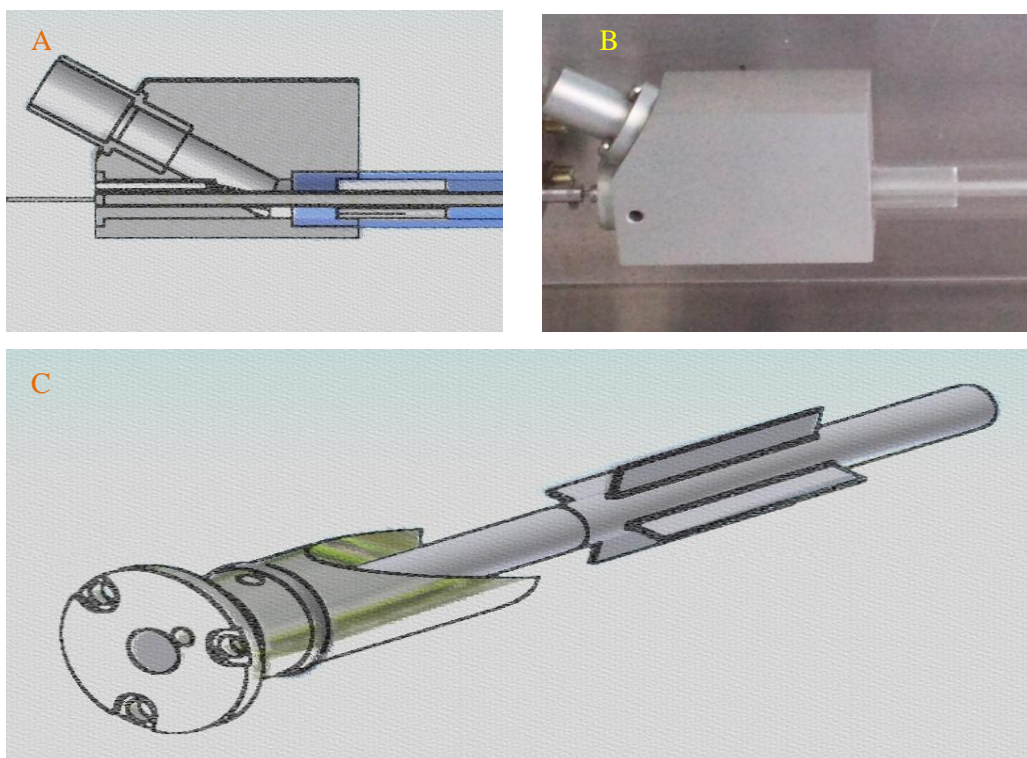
A) Straighteners assembly with end block. B) Experimental setup with end block. C) CAD assembly of straighteners with end block.
